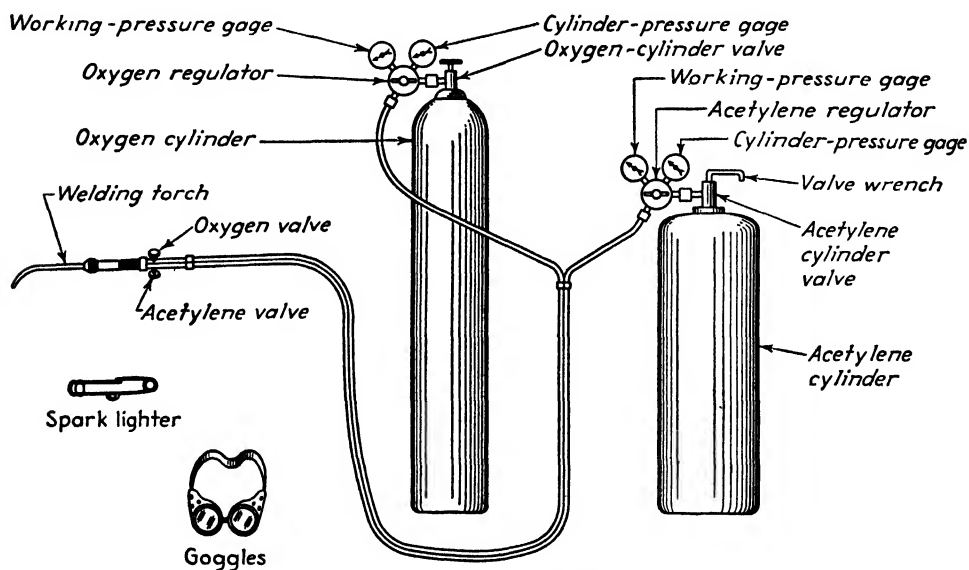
The parts of an oxyacetylene-welding outfit.
